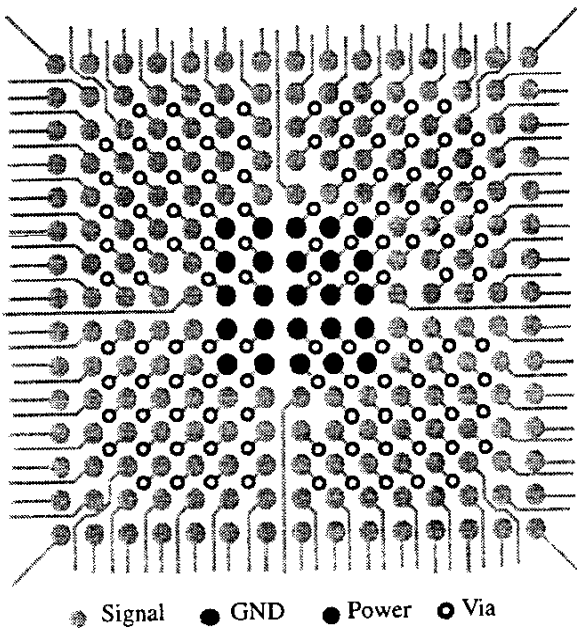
PC Board Top Surface Routing for 225 PBGA 112-Signal I/O Escapes
